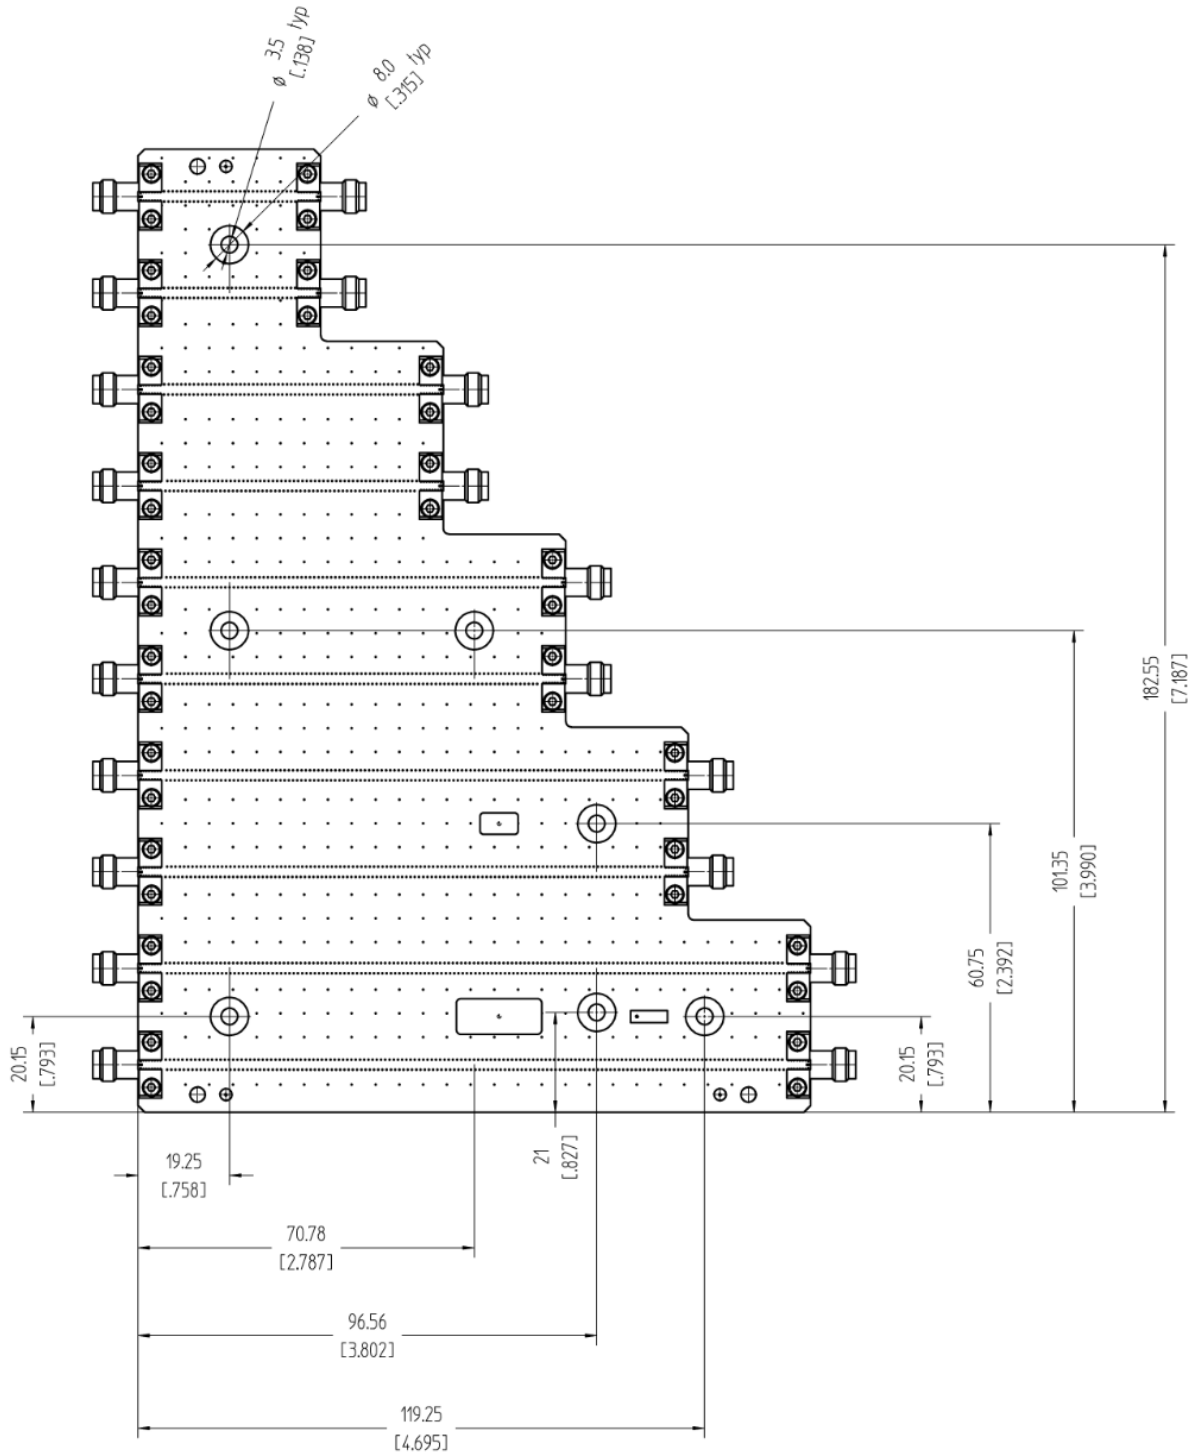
Mechanical drawing of M8049A-001 ISI channel boards with position of fastening holes.
